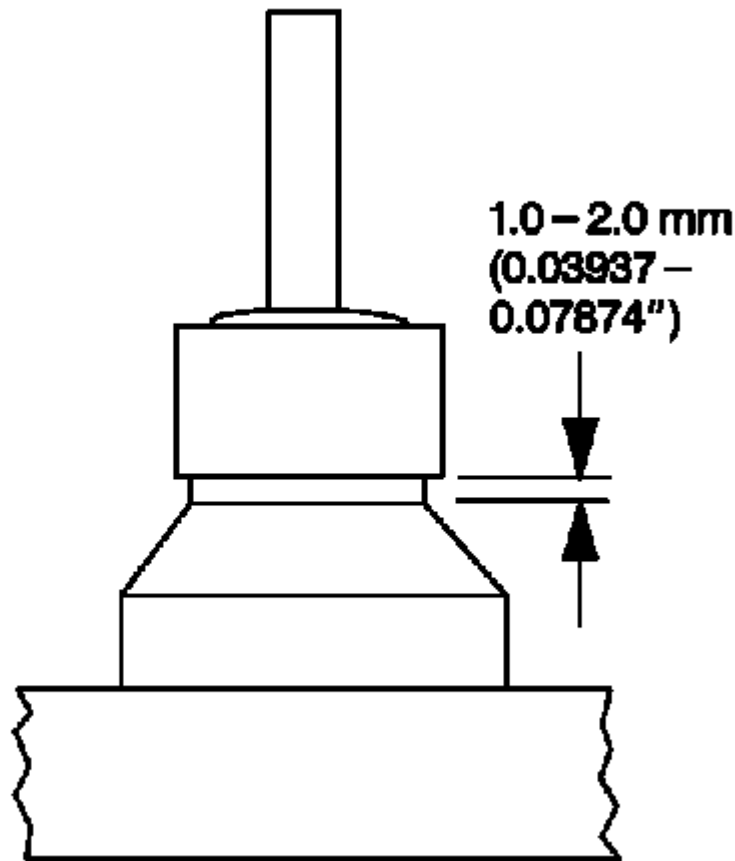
Identifying Gap Between Bottom Edge Of Valve Stem Oil Seal & Valve Guide
